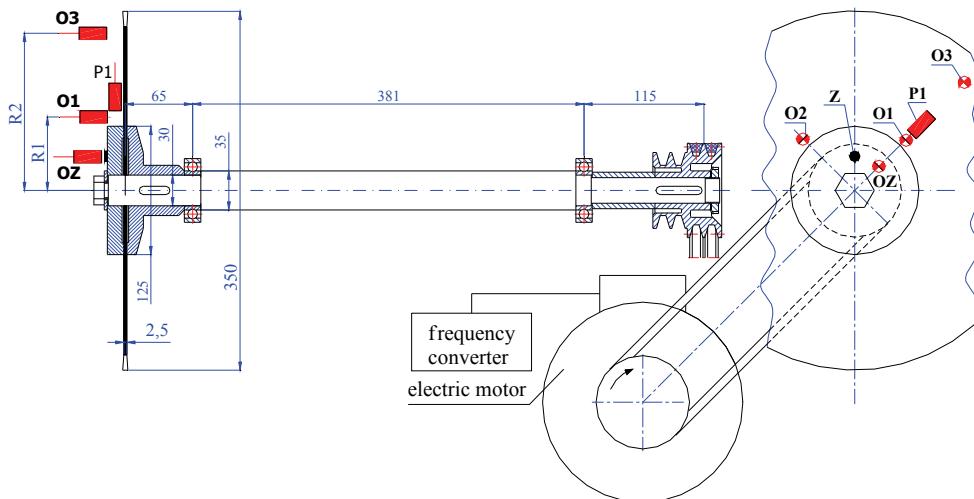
Scheme of the investigated circular sawing machine spindle system and sensors positions
